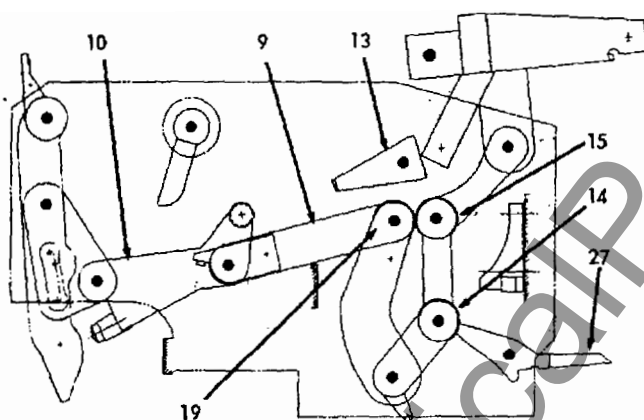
Closing latch (13) has been released freeing latch roll (19) and allowing springs to drive links (9) and (10) forward as a unit. Latch roll (19) forces toggle roll (15) forward with latch roll (14) held by trip latch (27) the breaker will close.
